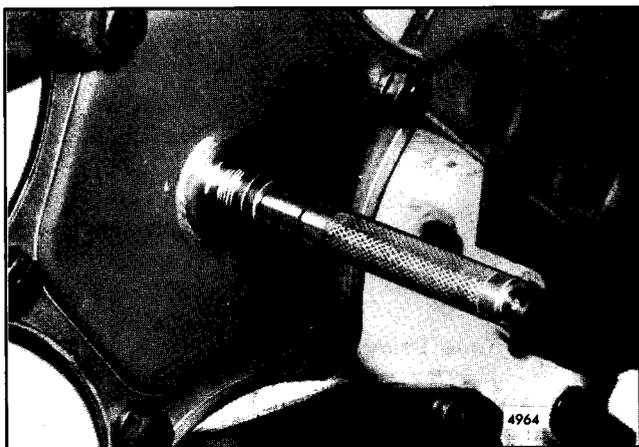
Checking Tachometer Drive Shaft Alignment
